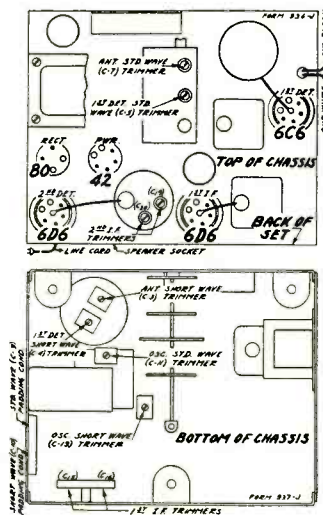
Chassis of the Wells-Gardner No. 5D Series, showing location of trimmers.
